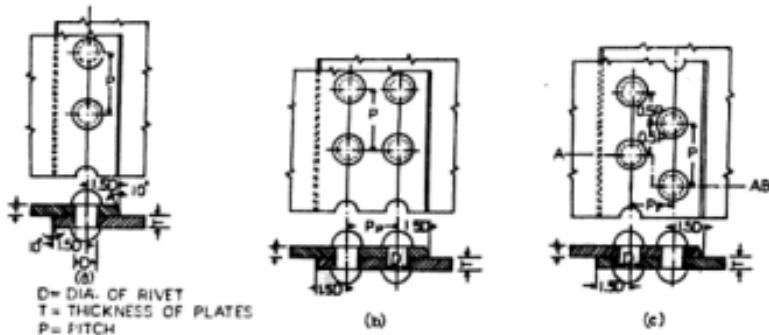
Different of lap joint: (a) Single riveted lap joint; (b) Double riveted chain lap joint; (c) Double riveted zig-zag lap joint
